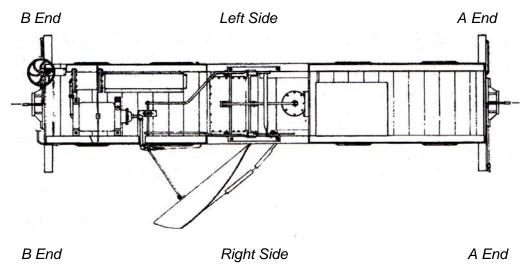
Drawing of the plan view of Flanger OD after D&RGW rebuilt it in 1941. Flanger OT differed in the blade and box shapes and in having a metal snow shield for the linkage in the center (Sloan, p. 291).
